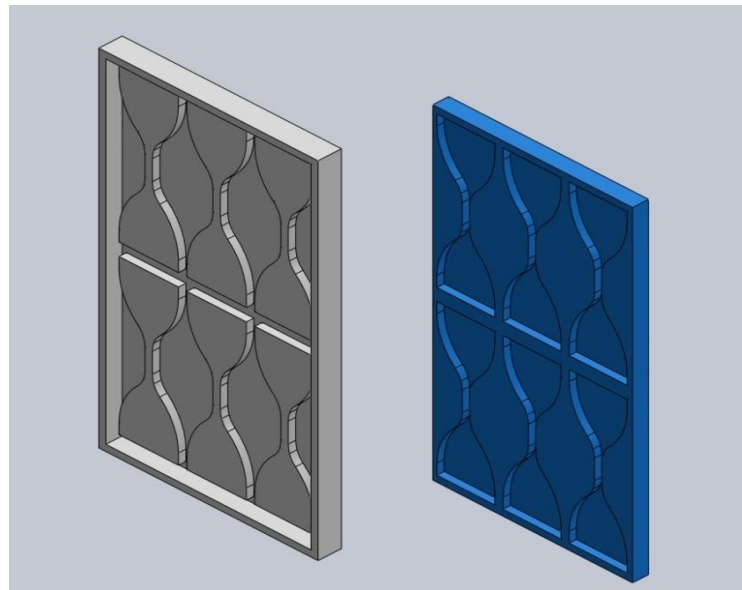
Tensile specimen solidworks drawing based on ASTM 638 standards.
